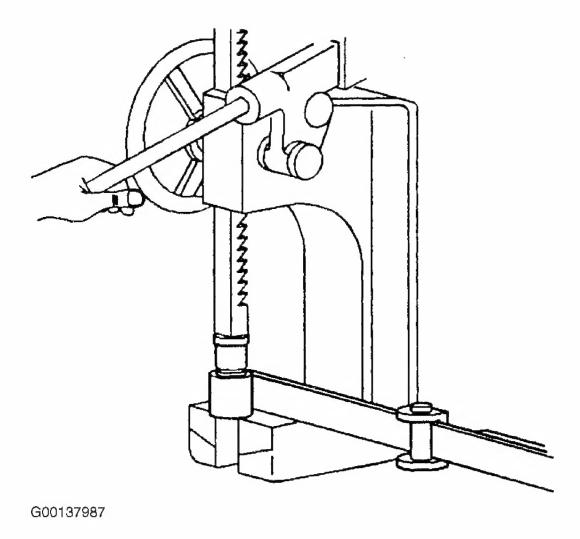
Removing Bushing From Spring Eye Courtesy of GENERAL MOTORS CORP.
